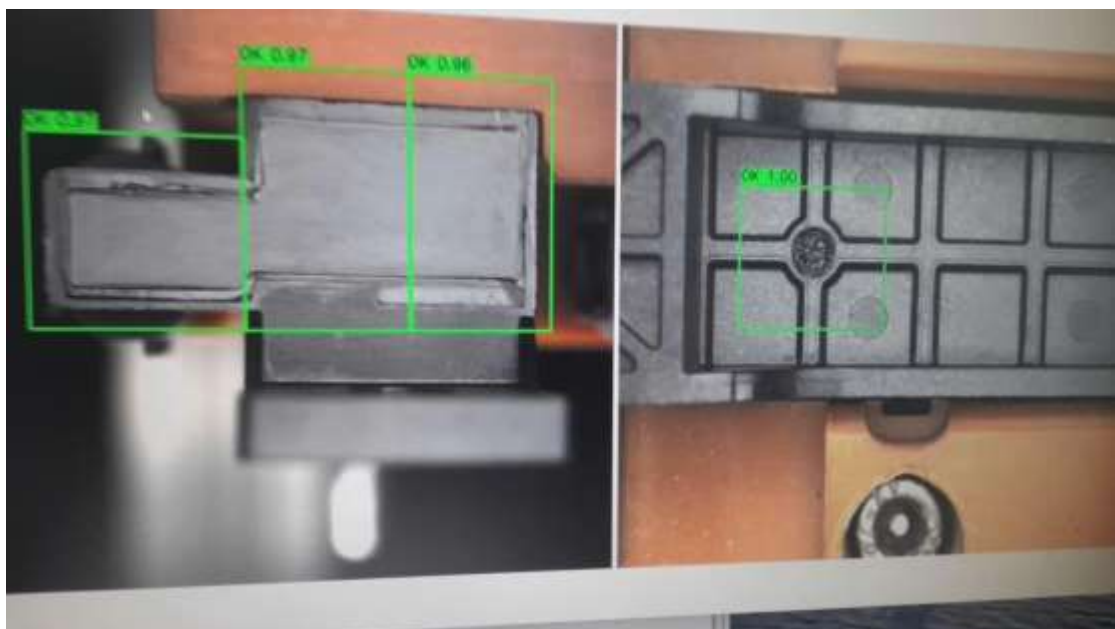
Actual defect inspection results for OK (conforming) casted parts
